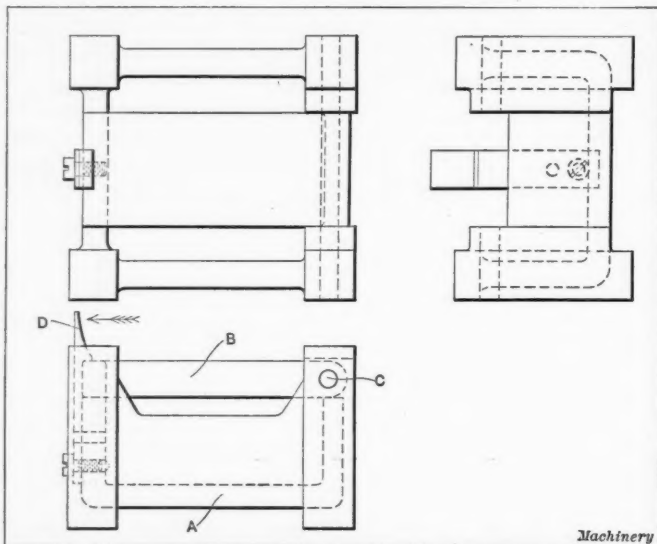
Type of Jig which has Cover held down by Spring Latch
